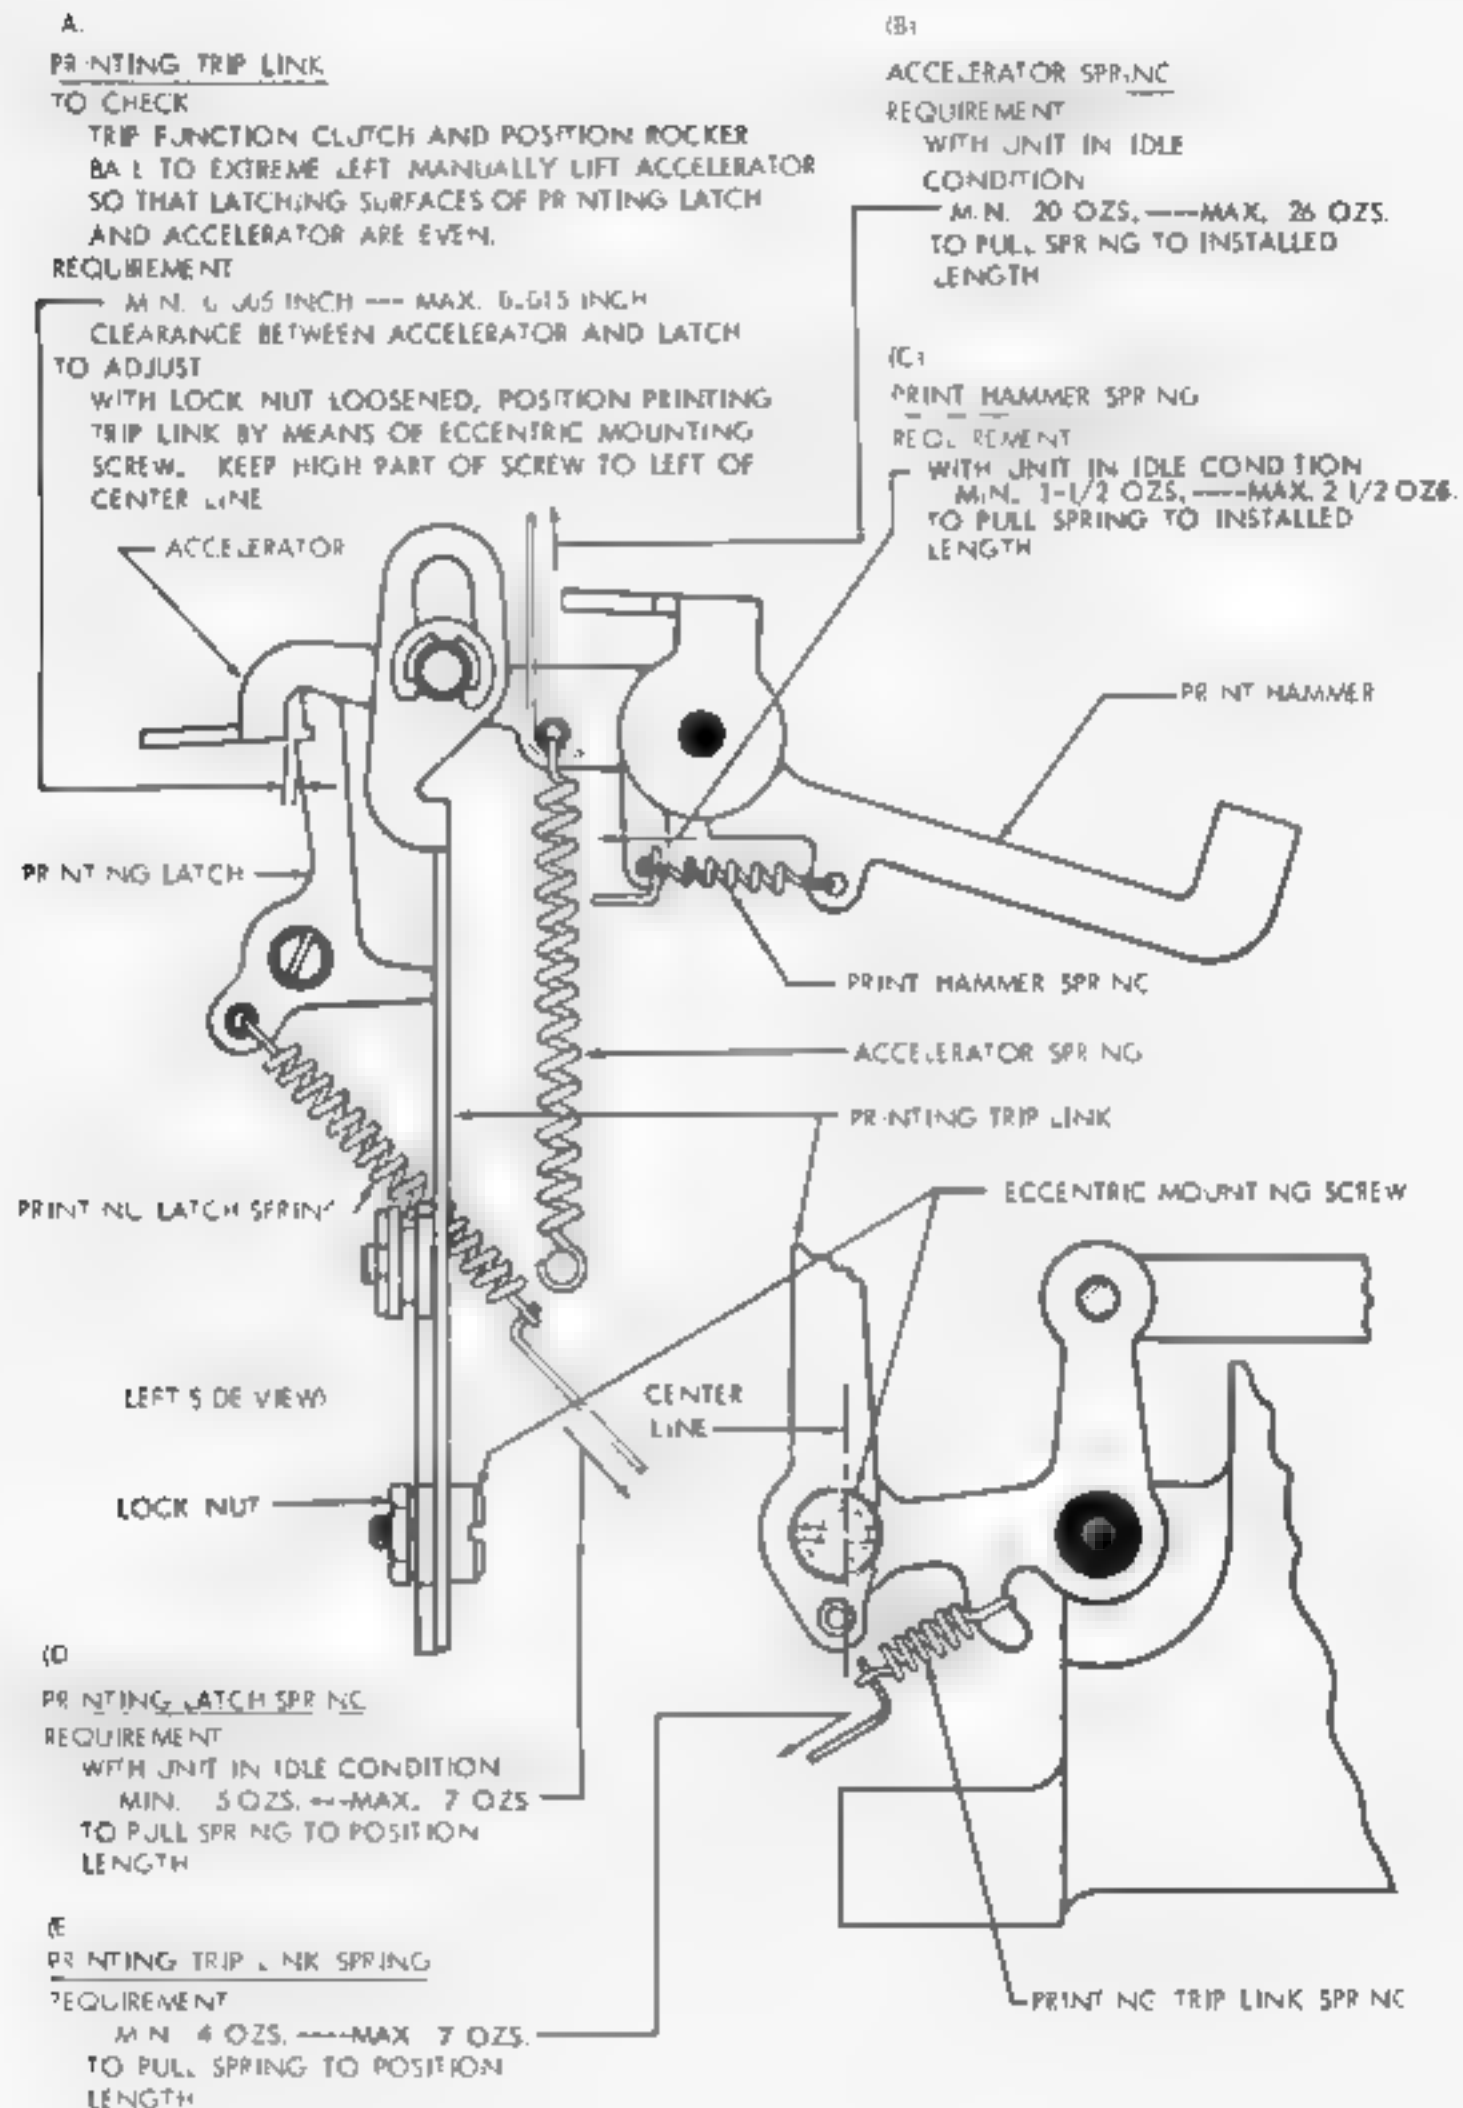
PRINTING MECHANISM FOR CHADLESS TAPE
